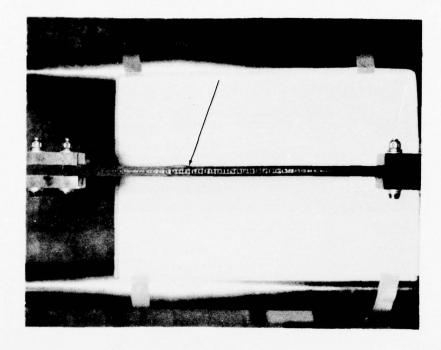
EDGEWISE VIEW OF AXIAL FATIGUE SPECIMEN SN-4 AFTER 800,000 CYCLES
